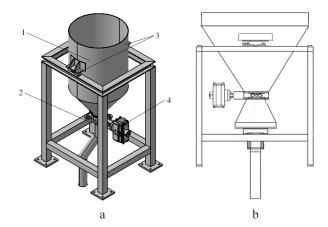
The three-dimensional diagram of the seed supply system 1- Seed charging barrel; 2- Load cell; 3- Pneumatic valve; 4- Solenoid valve
